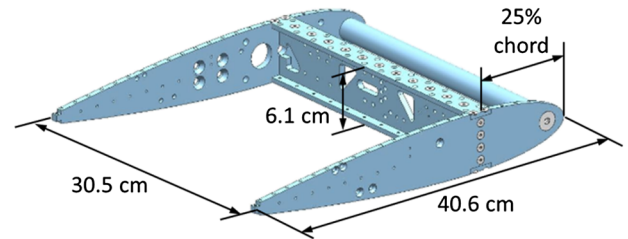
Paddle frame (test section) for chord morphing mechanism.
